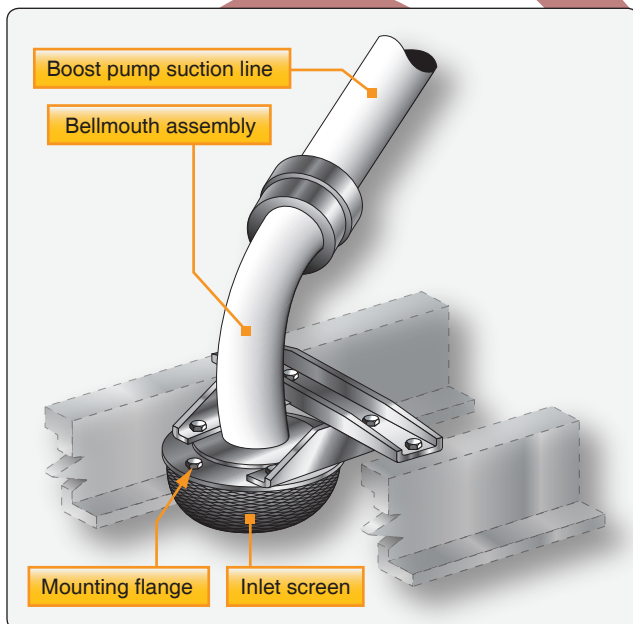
A typical fuel boost pump inlet screen installation for a centrifugal pump mounted outside of the bottom of the tank.
